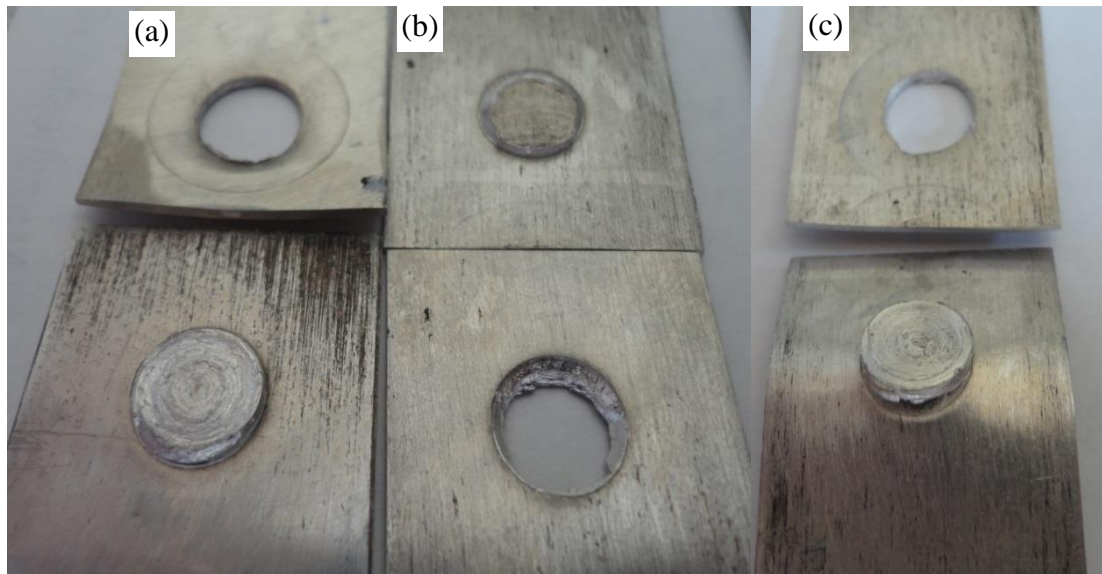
Examples of typical joint failure behaviours from similar Mg-Mg welds showing both halves of the fractured lap-shear test samples produced using modified RFSSW with a 1.0 mm sleeve plunge depth, 1.0 s welding time, and a tool rotation rates of (a) 2200 rpm, (b) 2500 rpm, and (c) 2800 rpm.
